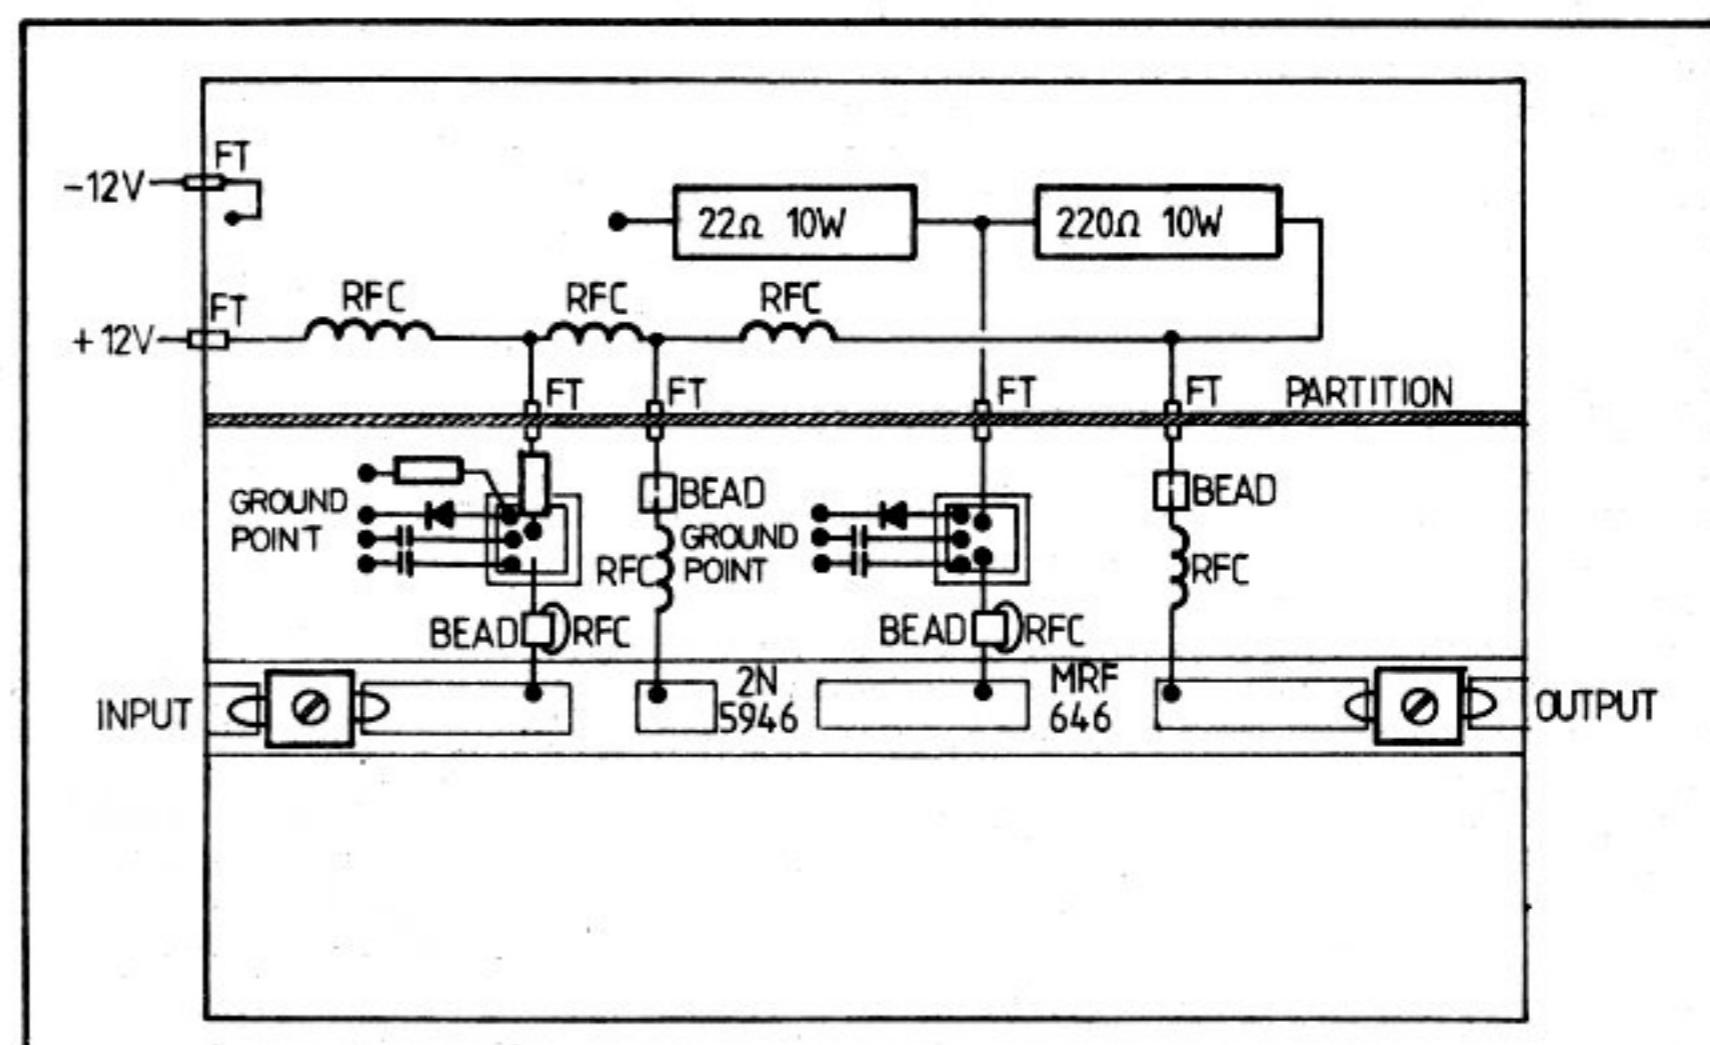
Layout of the printed-circuit board. Glass-epoxy board 1/32 inch thick is used, with one-ounce copper on both sides.
